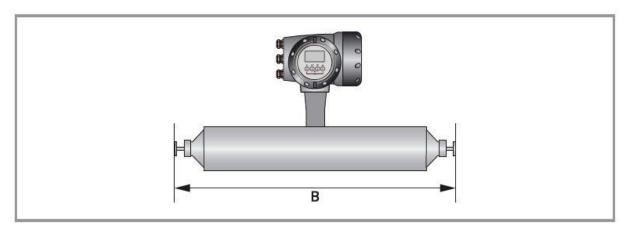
Hygienic Connections: All Welded Versions
